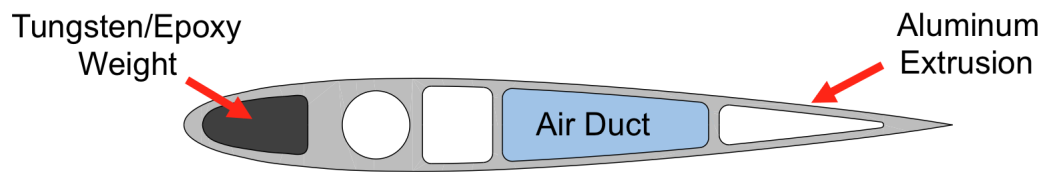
Extruded Aluminum AJAX ETR blade cross-section.
